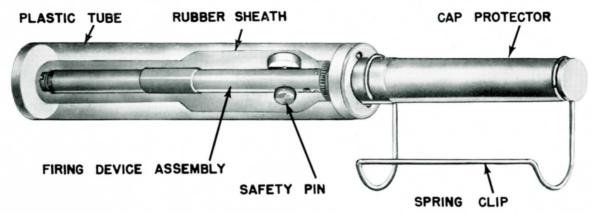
Phantom view showing firing device assembly in transportation tube.
